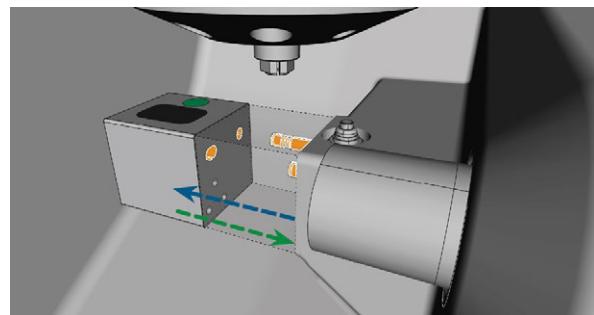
EXCHANGING THE TOOL MAGAZINE (TOOL MAGAZINE HOLDER AND HOLES IN THE TOOL MAGAZINE MARKED ORANGE)
